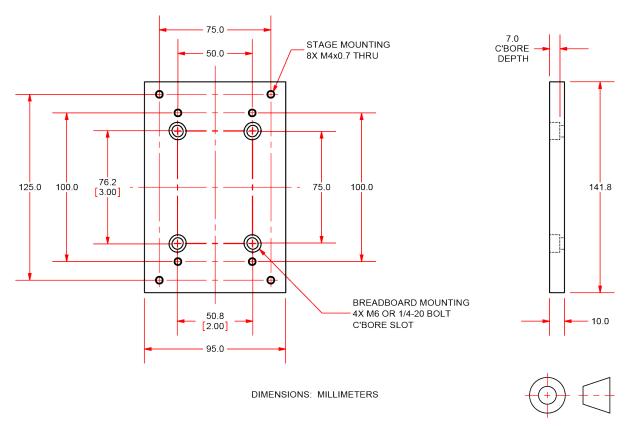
ANT95L-050 Mounting Plate (-MP) Dimensions
